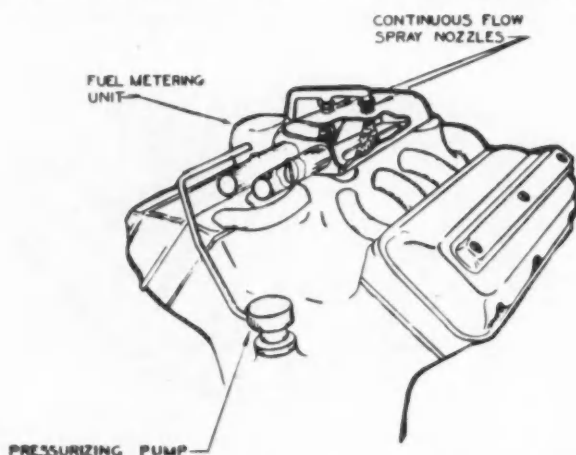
Fuel delivered by injection-carburetor system. Pressurizing pump delivers fuel to injection carburetor, which meters it and sends it to continuous-flow spray nozzles.
